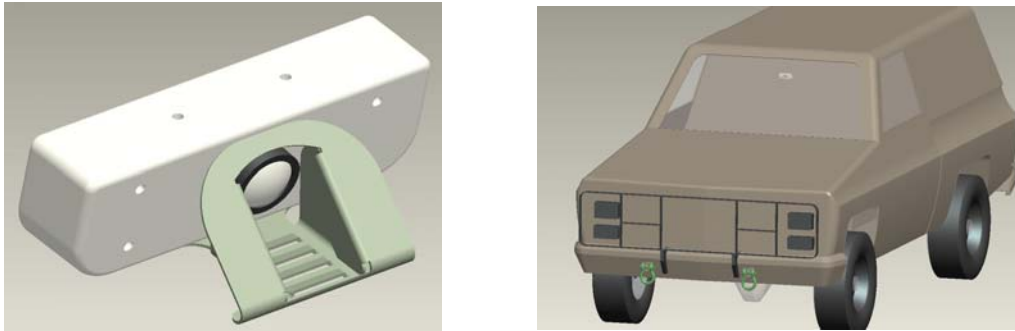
LDW camera and processor packaging, close-up and mounted on the windshield
